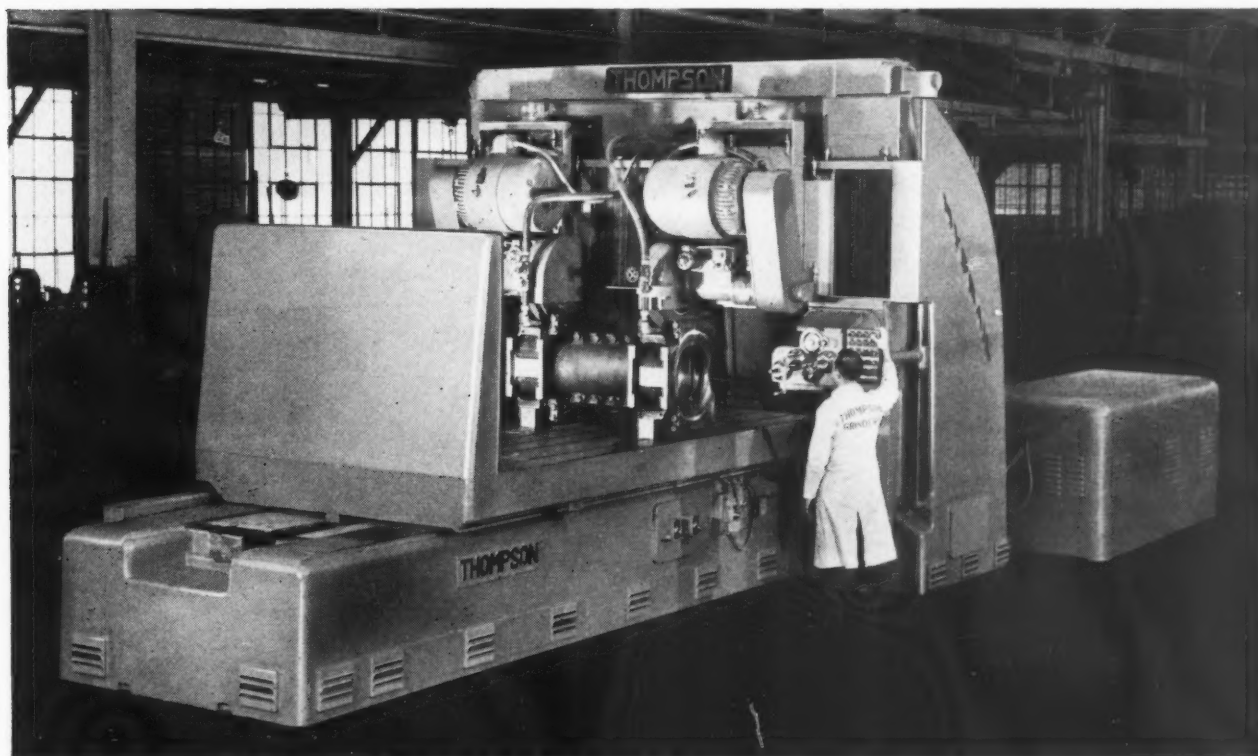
Thompson "Hydrail" surface grinder with anti-friction railroad housing in position for grinding hardened wear strips in the horn guides
